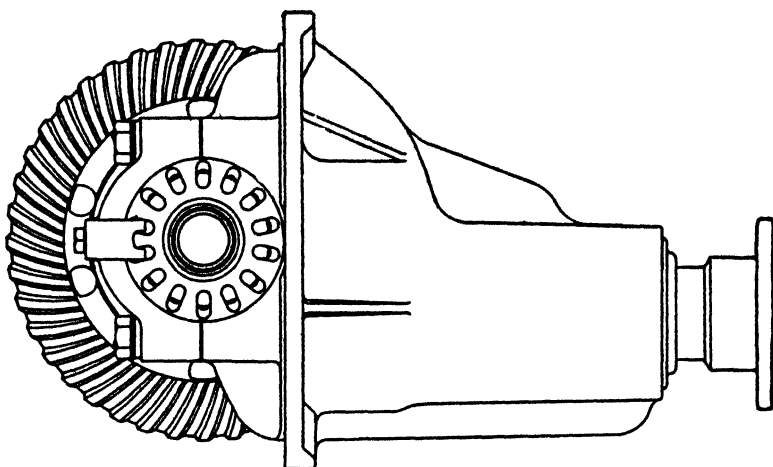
DIFFERENTIAL CARRIER FOR HYPOID GEARS.
